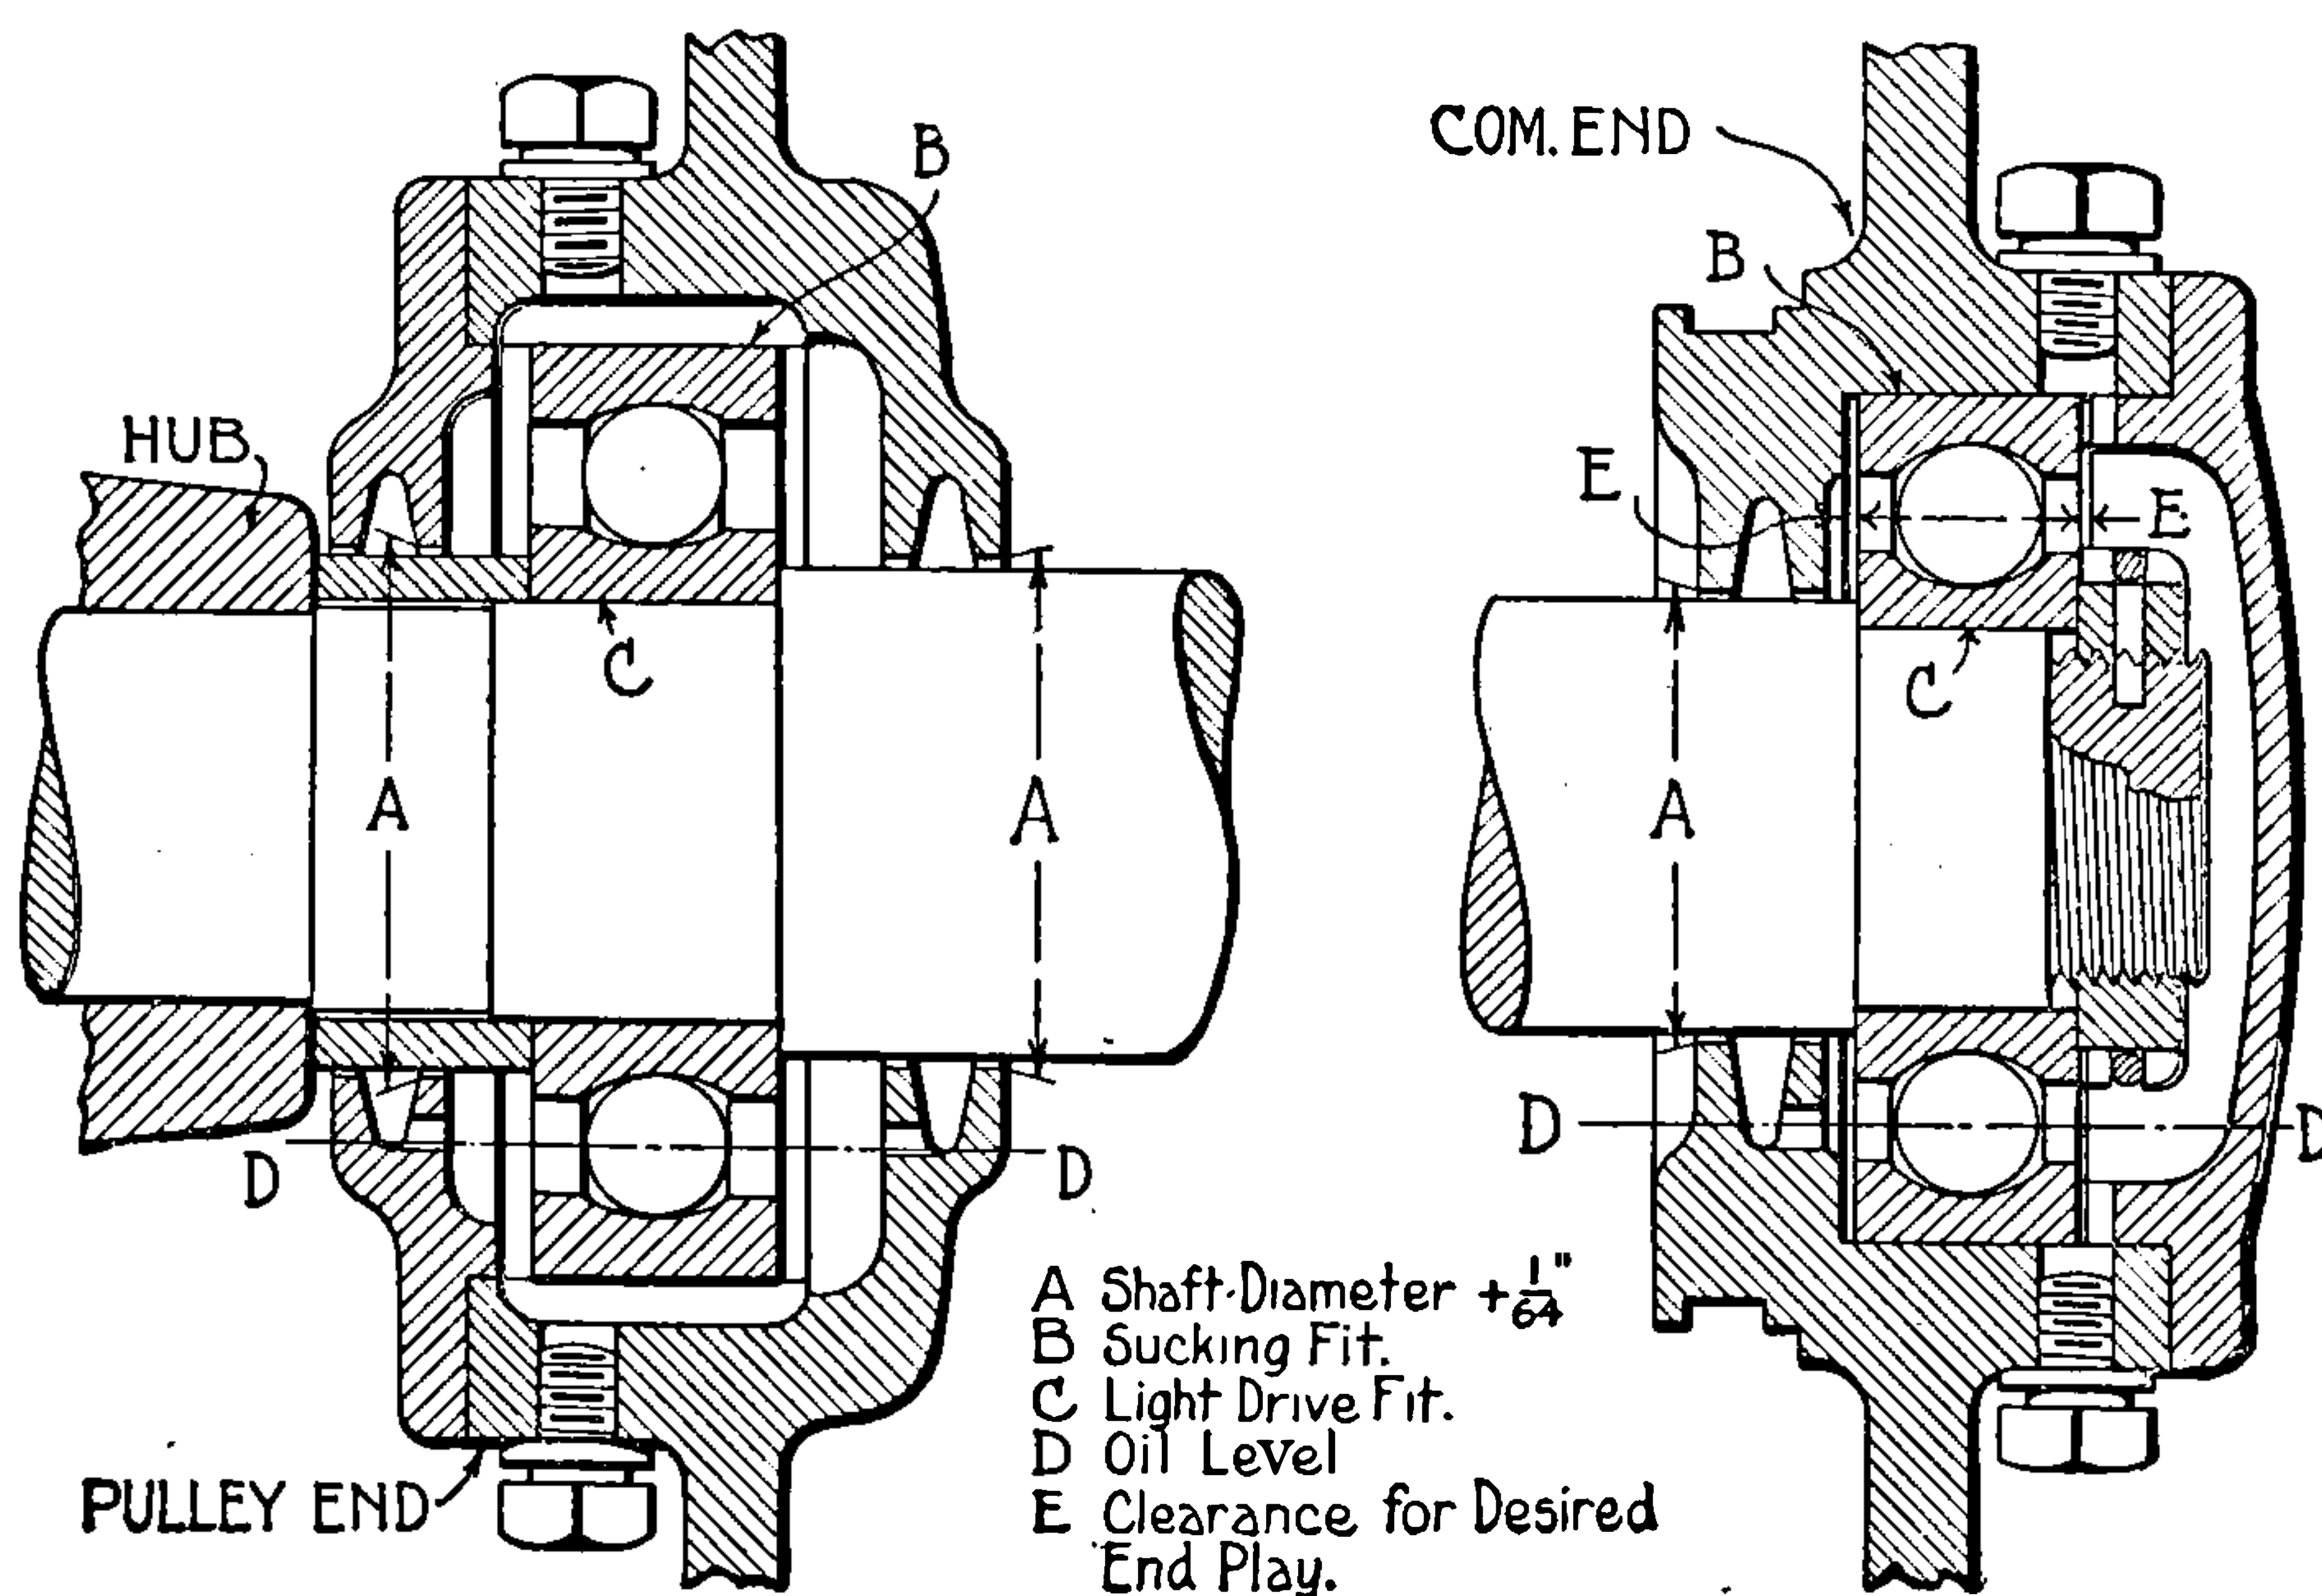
Ball-Bearing Mounting for Horizontal Motor-Shaft
